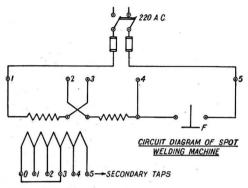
CIRCUIT DIAGRAM OF SPOT WELDING MACHINE.
